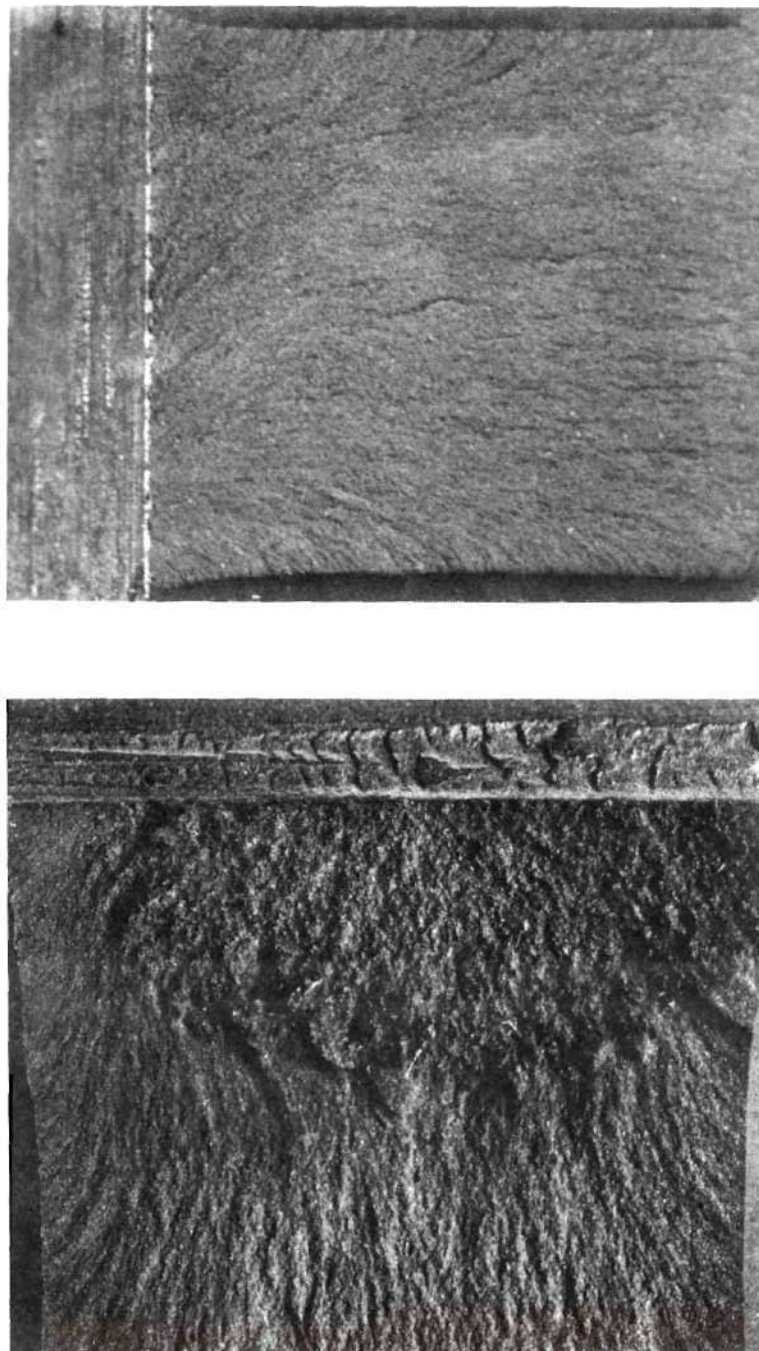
Macroscopic Appearance of Fracture Surfaces: (a) K_x Specimen; (b) Typical Hydrogen Embrittlement Fracture.
